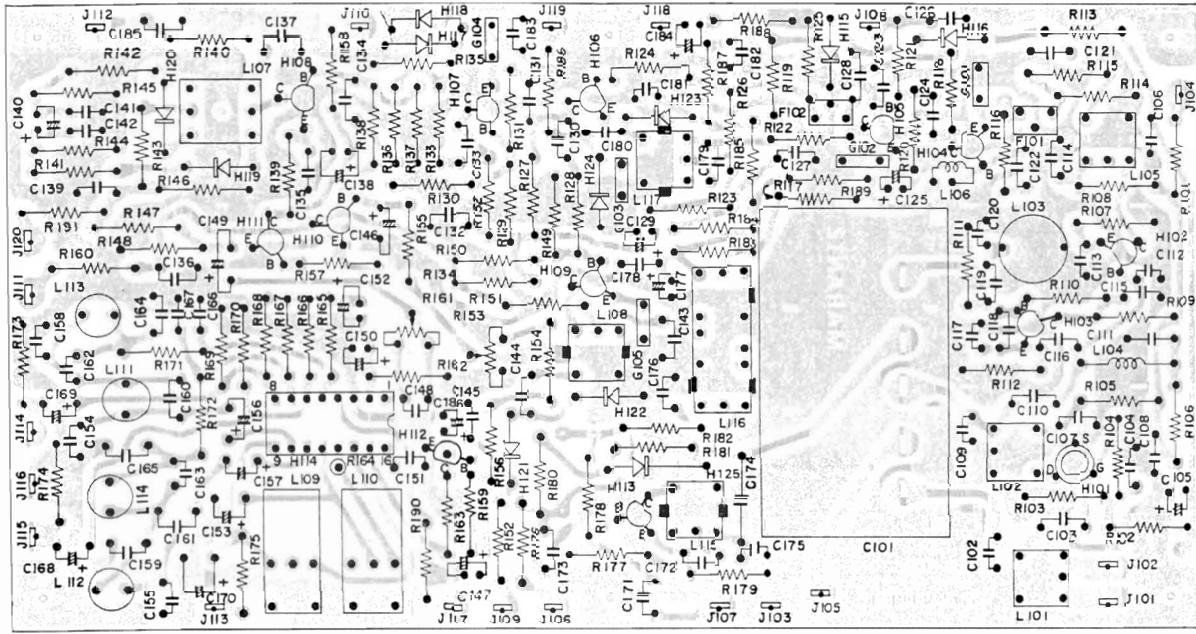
AM and FM Tuner Assembly P100 Component Locations
